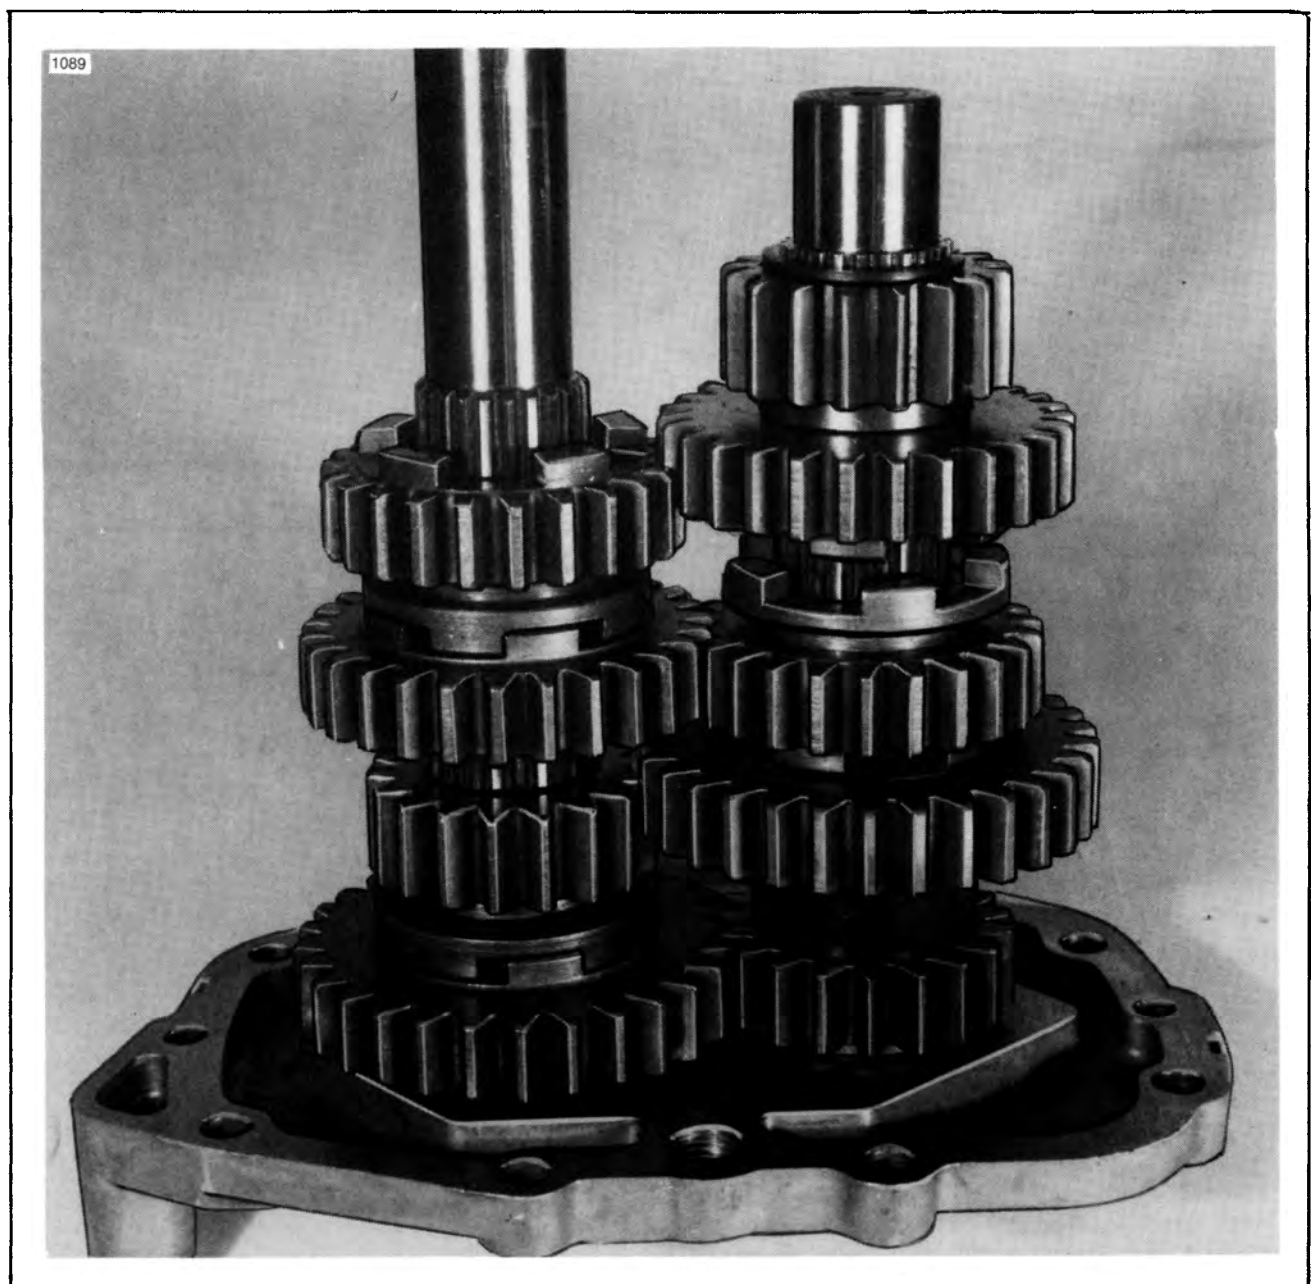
Side Door, Mainshaft and Countershaft — Final Assembly
